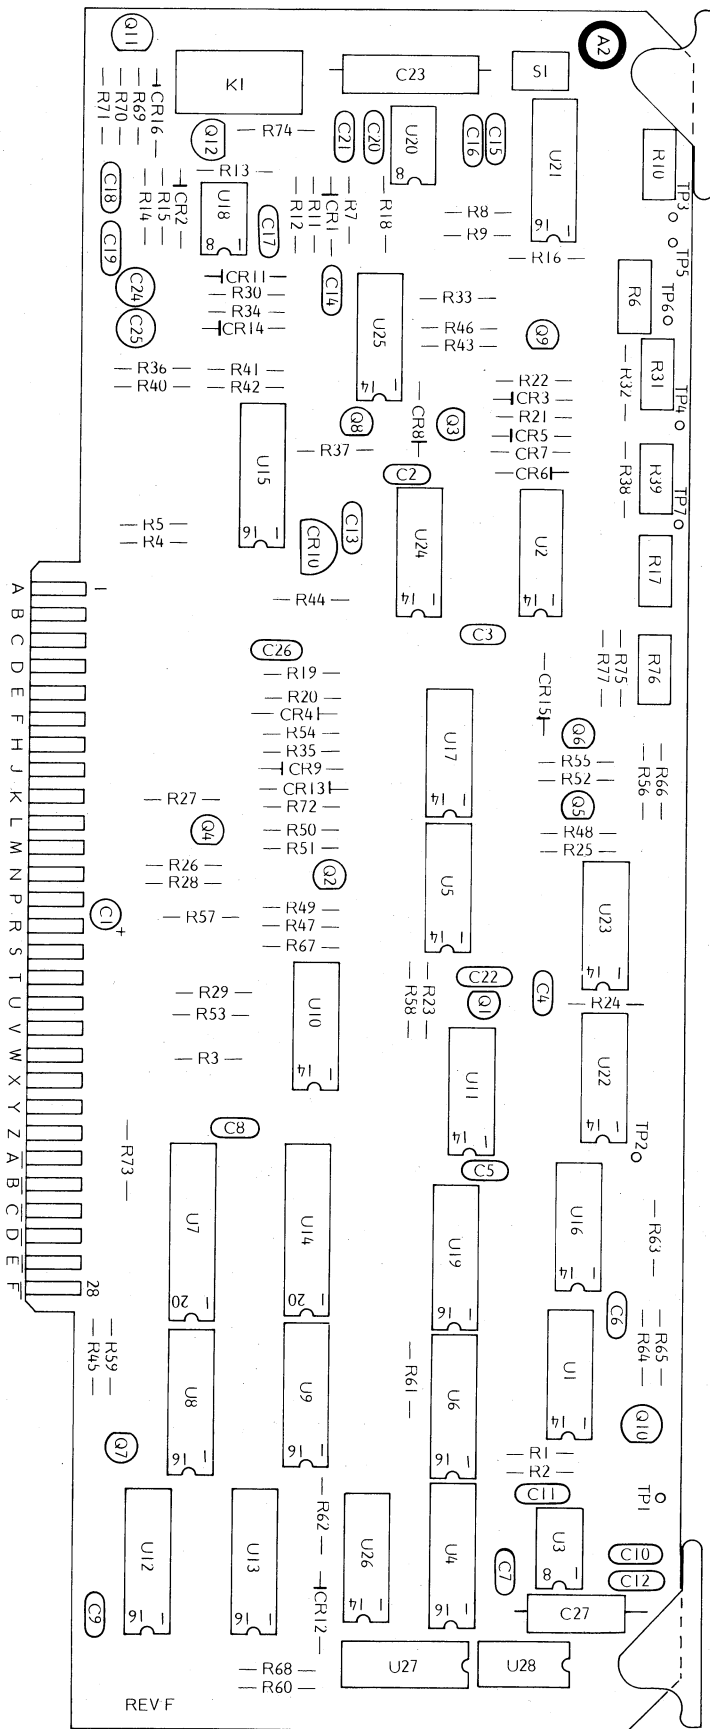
A2 Ramp Generator PCB Schematic (Sheet 1 of 3)
